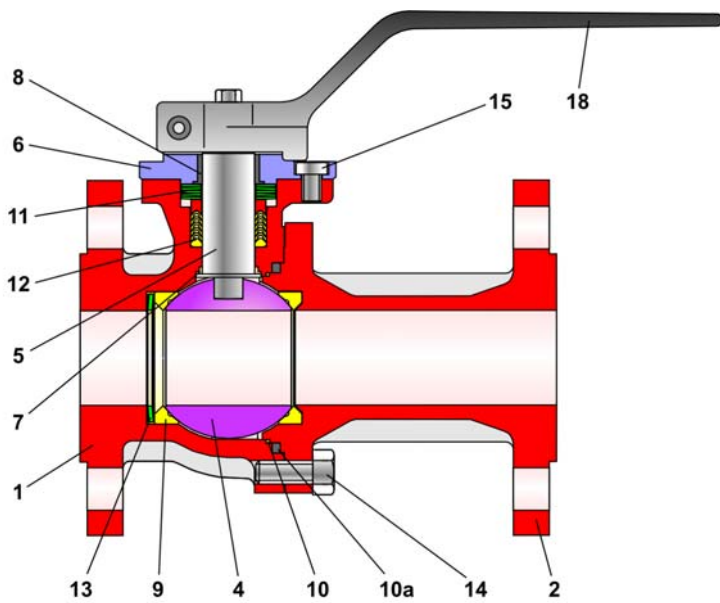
Ball valve with live-loaded sealing system, face to face series 1
